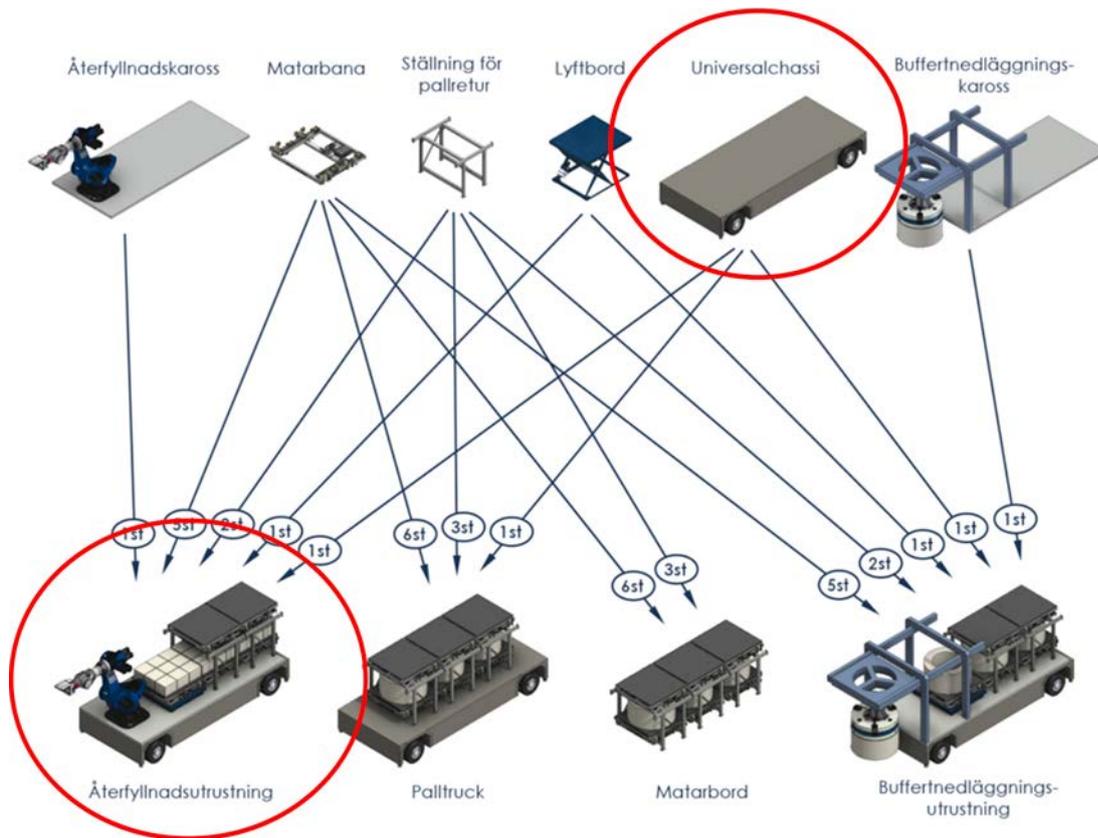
Modular chassis concept, with parts used for installation of backfill circled.
